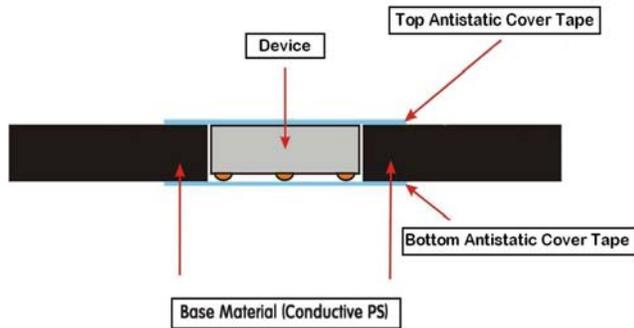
Illustration of a solder bumped die packaged in MicroTape tape and reel format.
